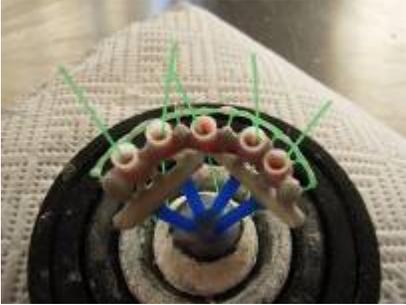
A thin gauge sprue wire is inserted into each cylinder
